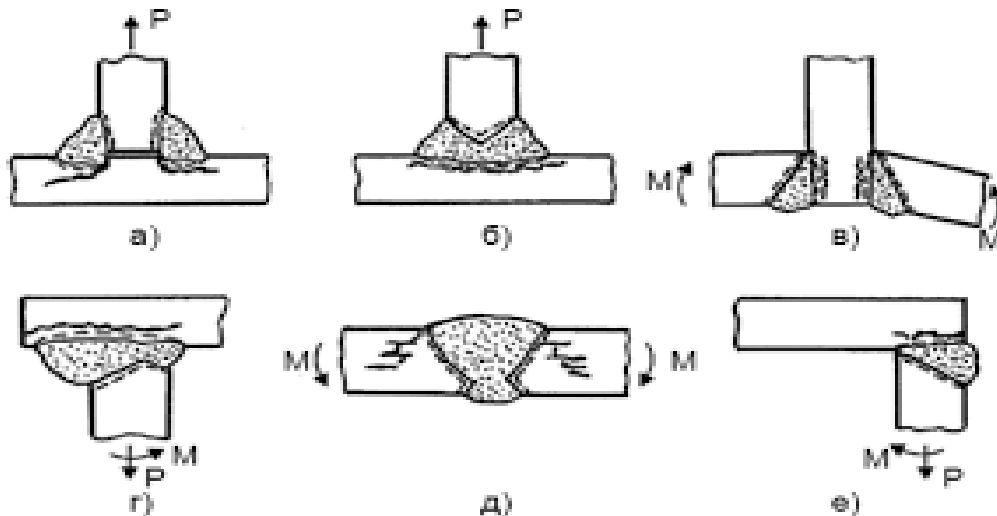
Examples of different crack propagation in welded joints
